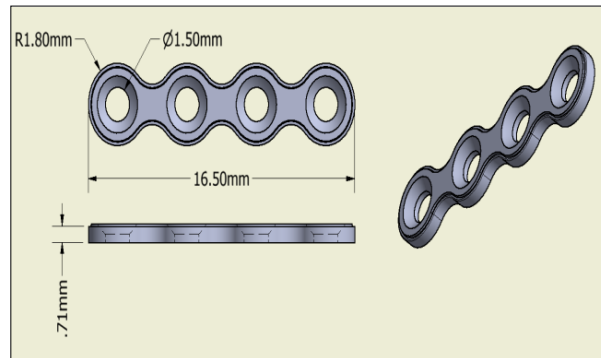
Orthopaedic jaw bone implant plate in the smallest dimension.
